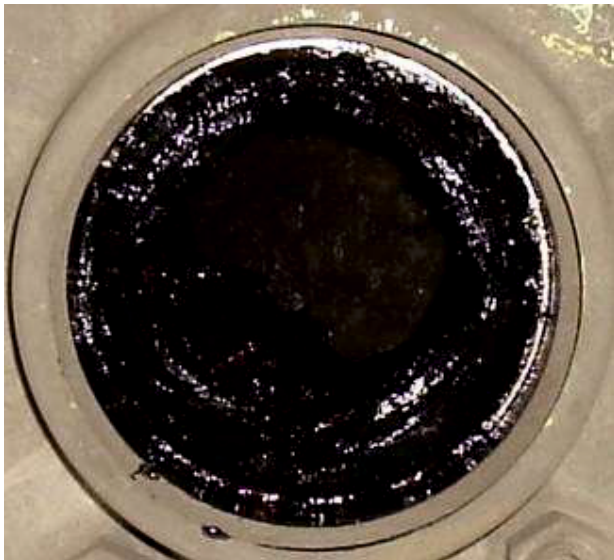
Rear Left Hand Side Wheel Bearings & Wheel Hub of Vehicle – 2.
